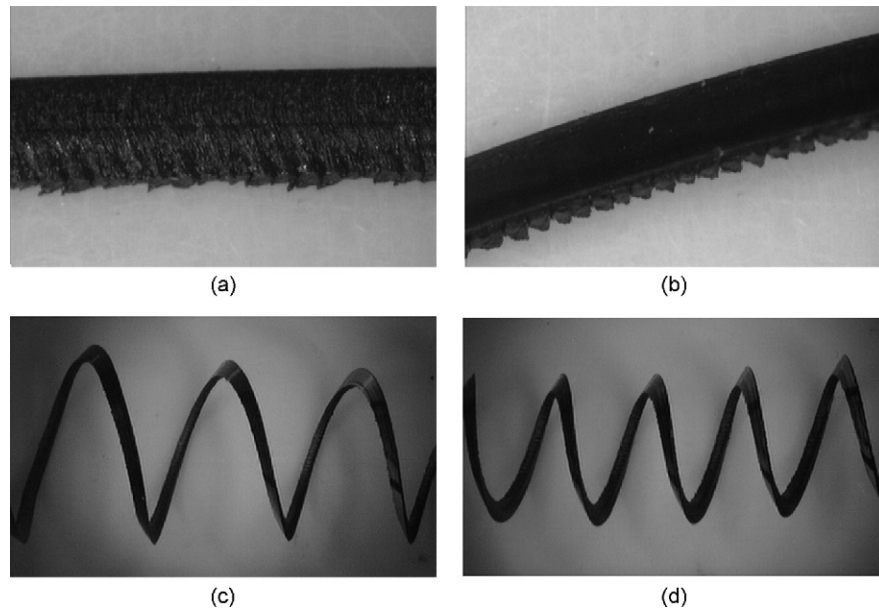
Optical images of the chips. (a) Dry cutting; (b) flood cooling; (c) oil lubrication; (d) solid lubrication.
